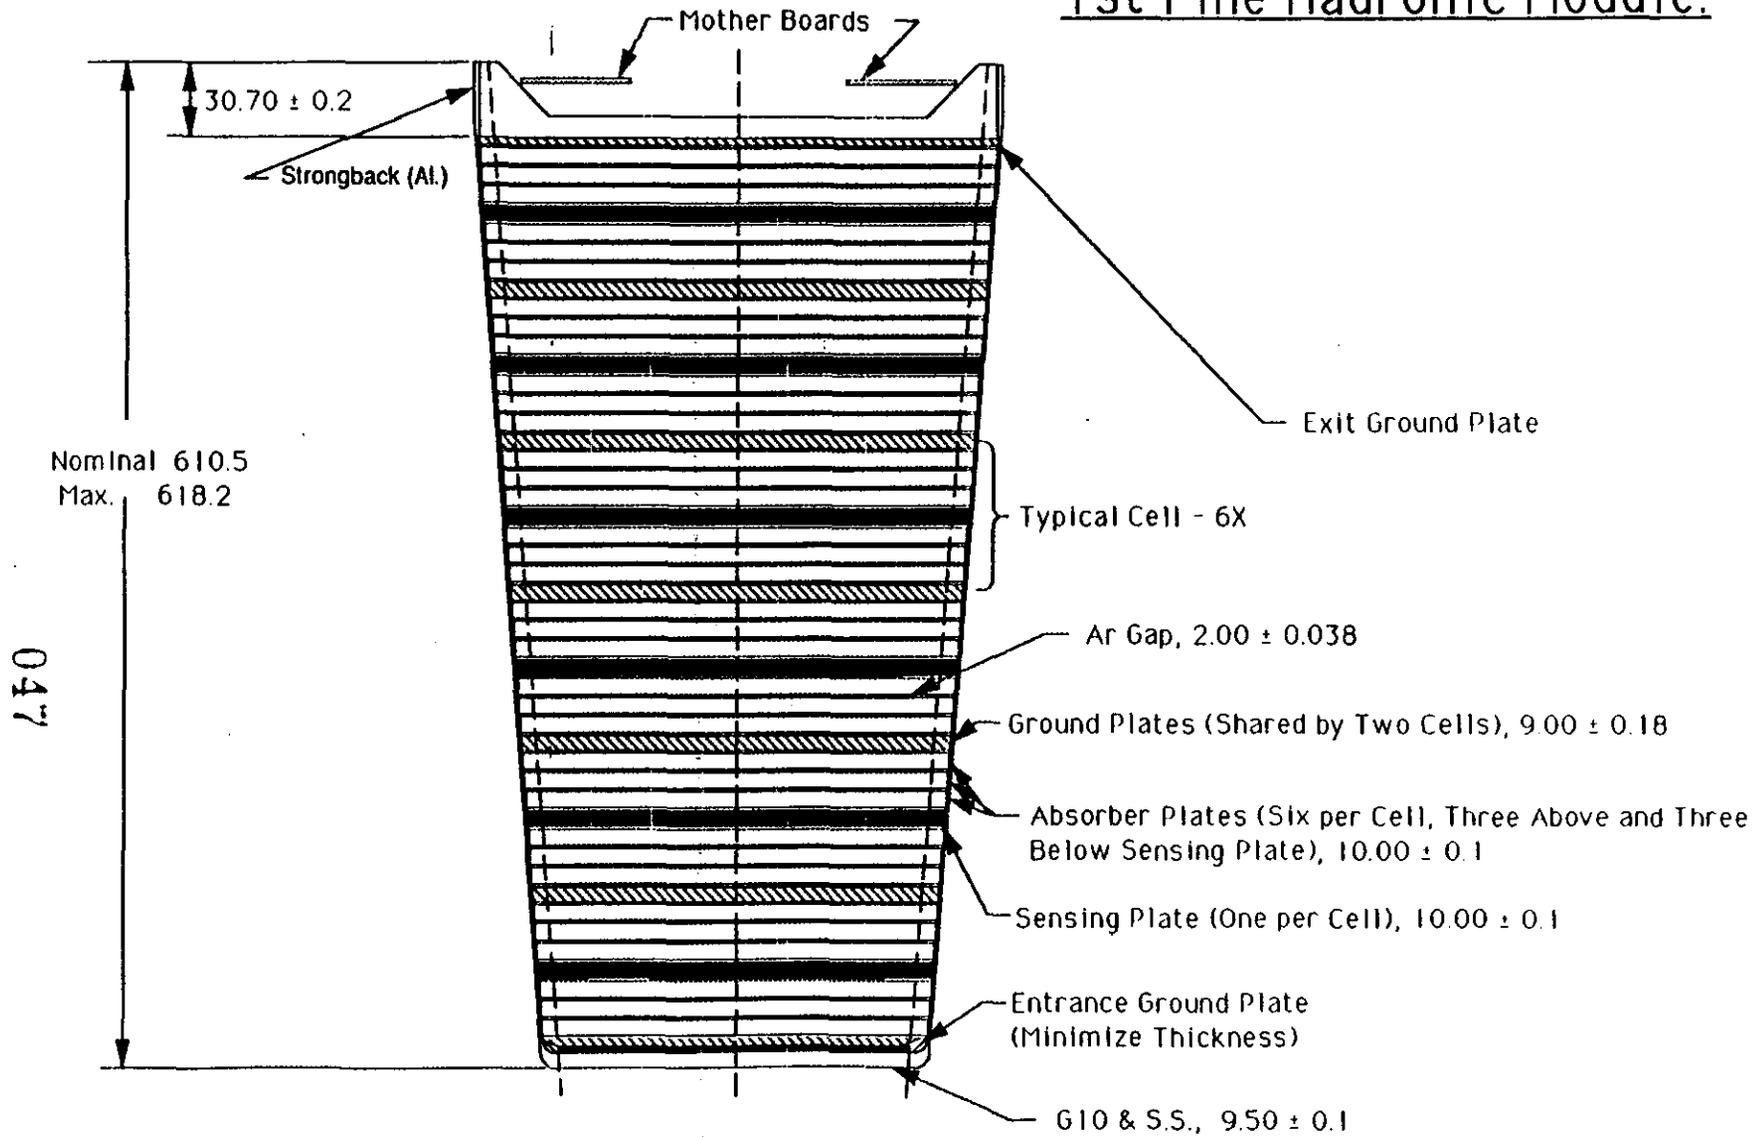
First Fine Hadron Module Showing Stack Height and Element Tolerances
